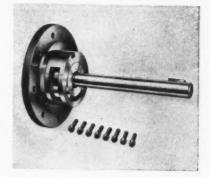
Brown & Sharpe pump unit illustrated in Fig. 2 without housing
